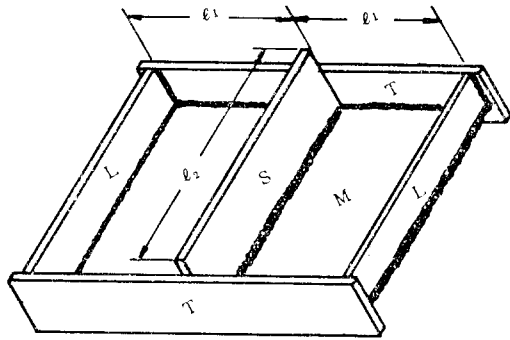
Angular changes at fillet weld cause distortion of plating
